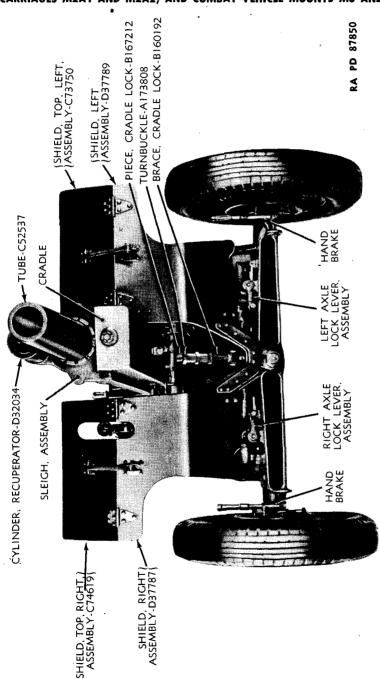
105-mm Howitzer M2A1 and Carriage M2A1 - Front View
